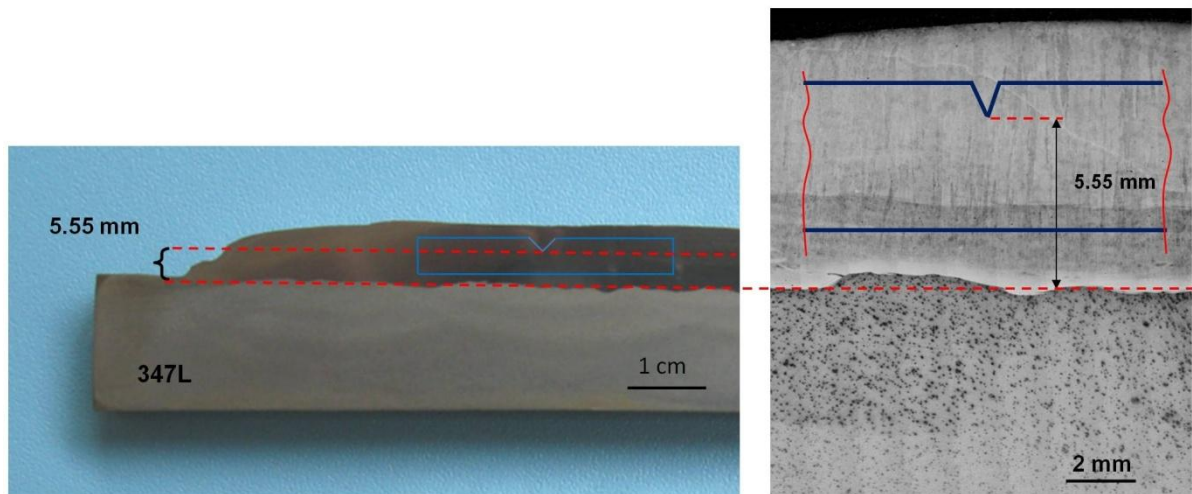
Location of Charpy samples in 347L stainless steel weld deposit
